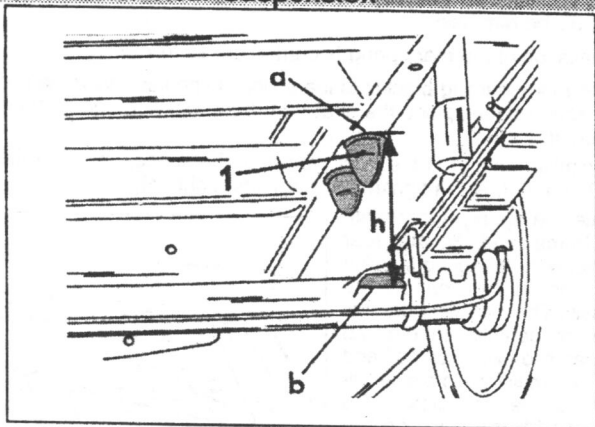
The rebound rubber (1) is used to measure the height of the rear axle when tightening the springs. Measure between points "a" and "b".
